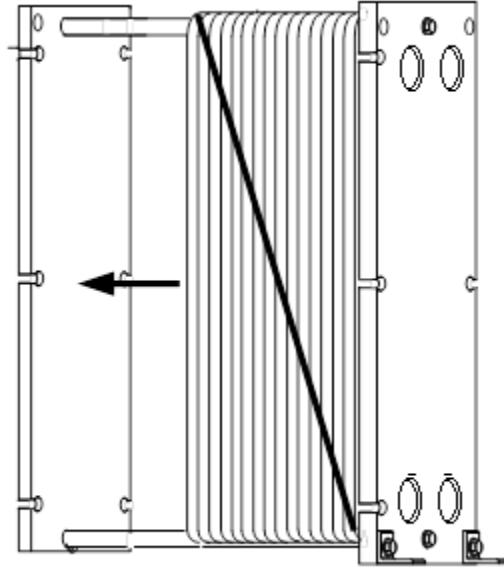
Heat Exchanger with Pressure Plate Slid Back
